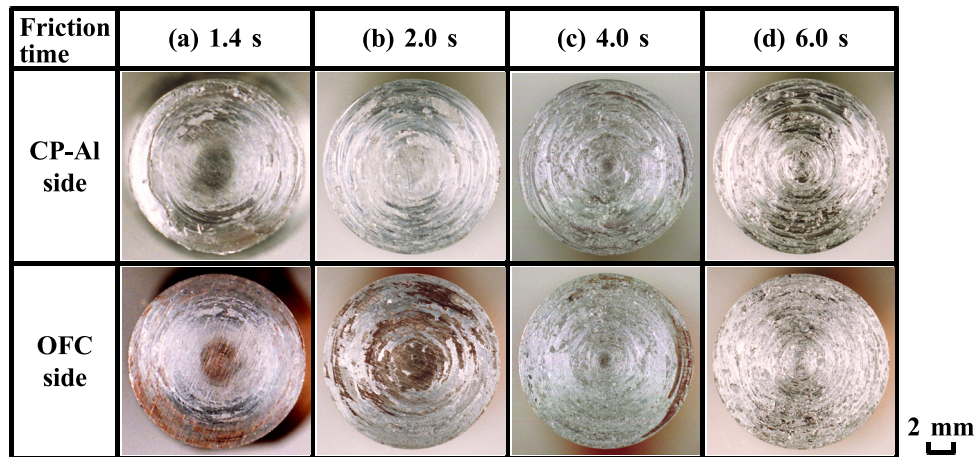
Fractured surfaces of tensile tested joints at various friction times: forge pressure of 30 MPa.
